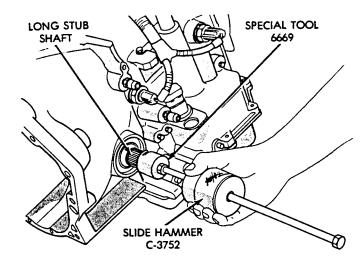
Remove Long Stub Shaft From Bell-housing CAUTION: Drive shaft retainer clips and seals located on the stub shafts must be replaced before reinstalling drive shafts.
